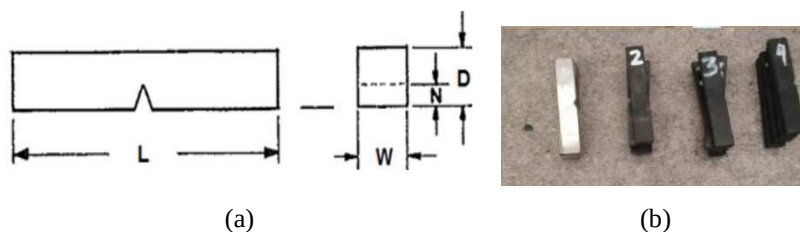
Schematic and physical views of impact test specimens for SMAW-welded AH36 steel after heat treatment for (a) illustration of specimen dimensions for impact test and (b) photographs of specimens labelled 1–4 for various PWHT conditions
